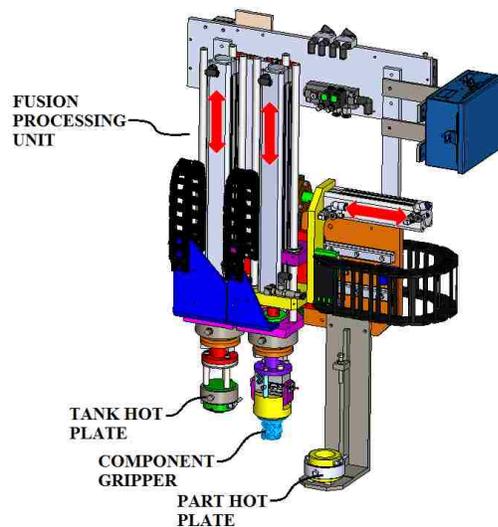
Fusion Unit Assembly Illustration (Courtesy SPM Automation (Canada) Inc.)
